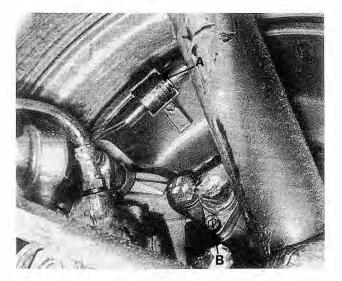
Electrical connection at front strut for brake pad wear indicator (A). Internal-hex-head screw (B) secures ABS sensor.
